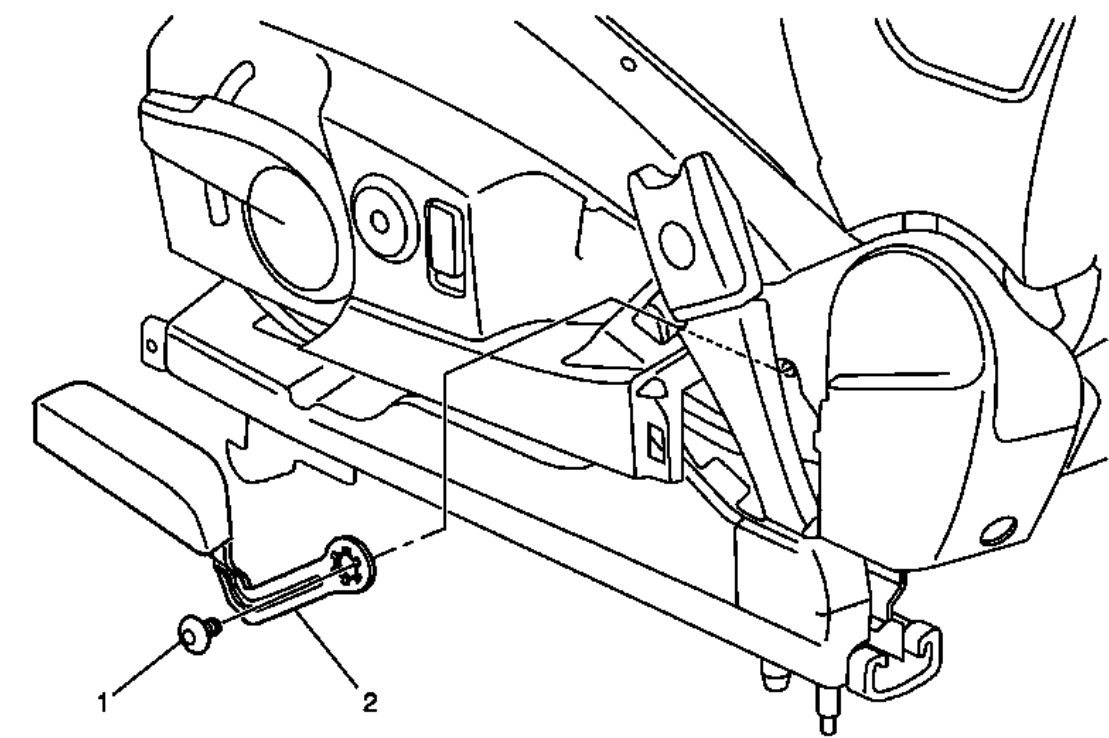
Driver Or Passenger Seat Recliner Lever & Fastener
